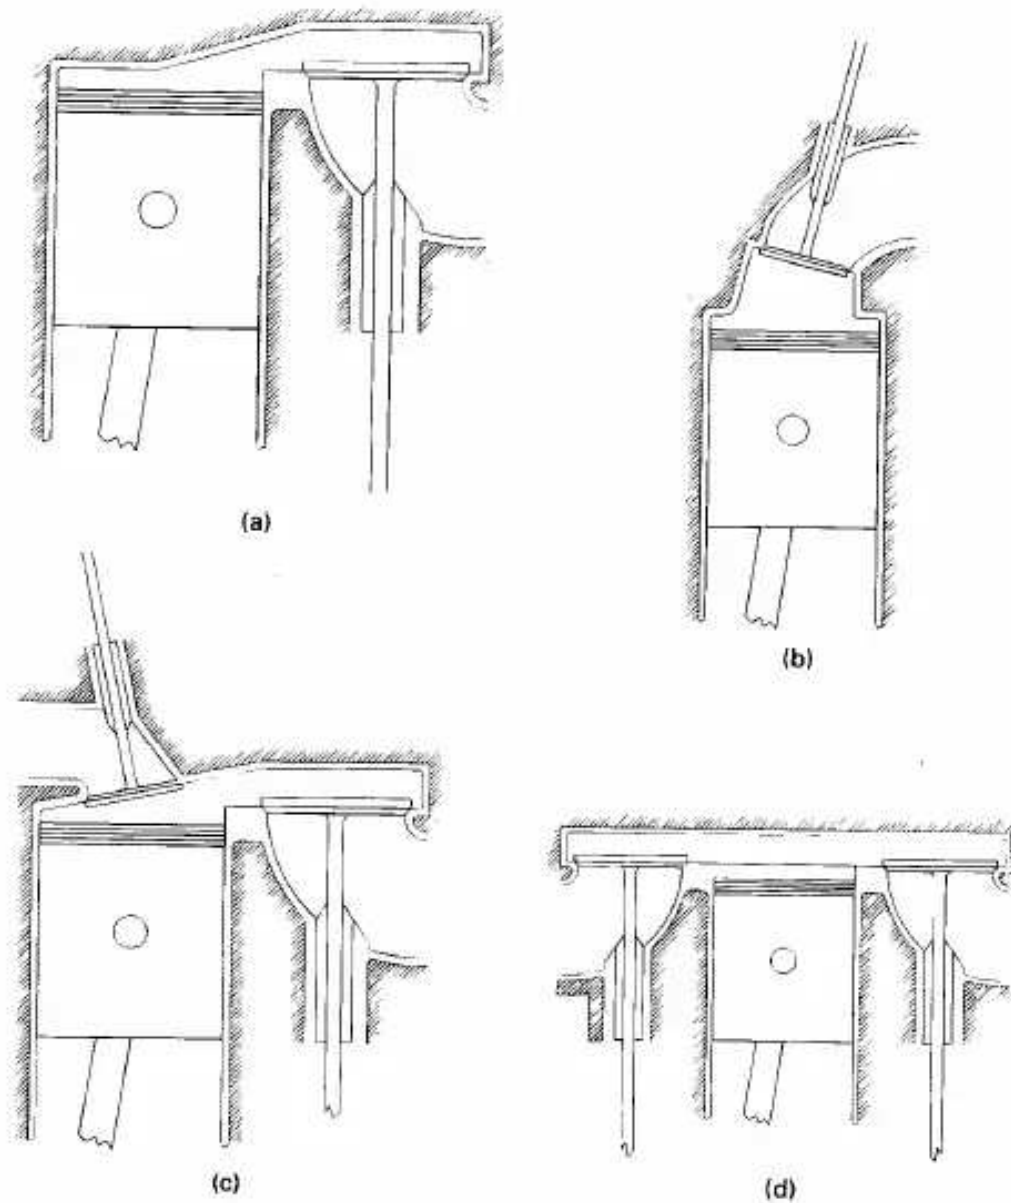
Engine Classification by Valve Location. (a) Valve in block, L head. Older automobiles and some small engines. (b) Valve in head, I head. Standard on modern automobiles. (c) One valve in head and one valve in block, F head. Older, less common automobiles. (d) Valves in block on opposite sides of cylinder, T head. Some historic automobile engines.
